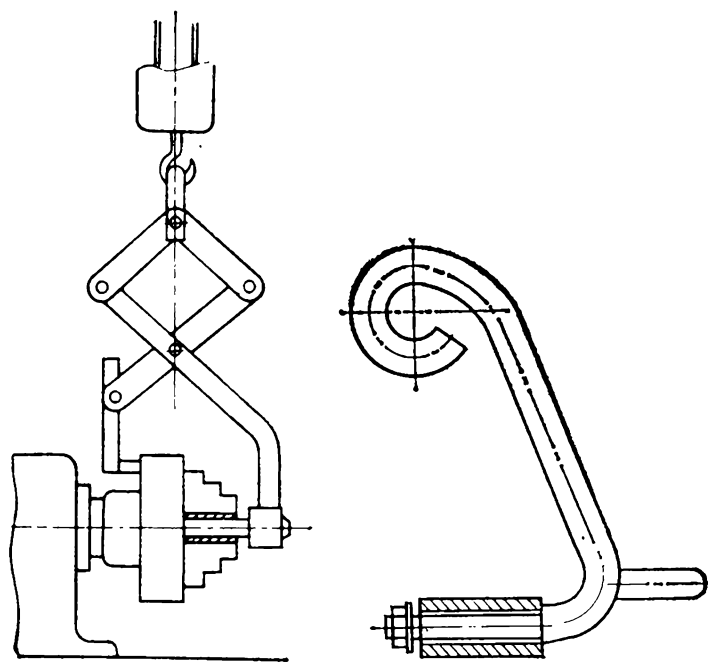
A hoisting device for safe lifting, positioning and removal of chucks and workpieces
